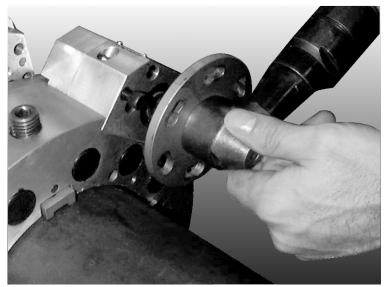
Align the bolt holes in the motor flange with the two SHCS in the pinion housing.
